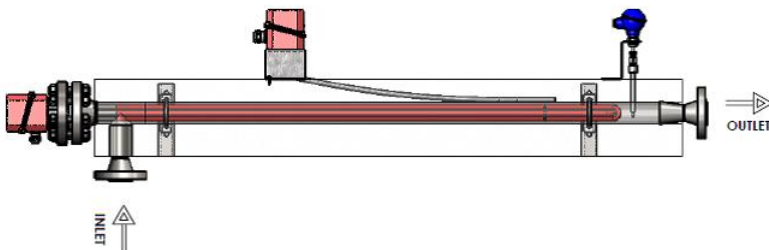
Cross-section of the inner tube with a thermocouple.
